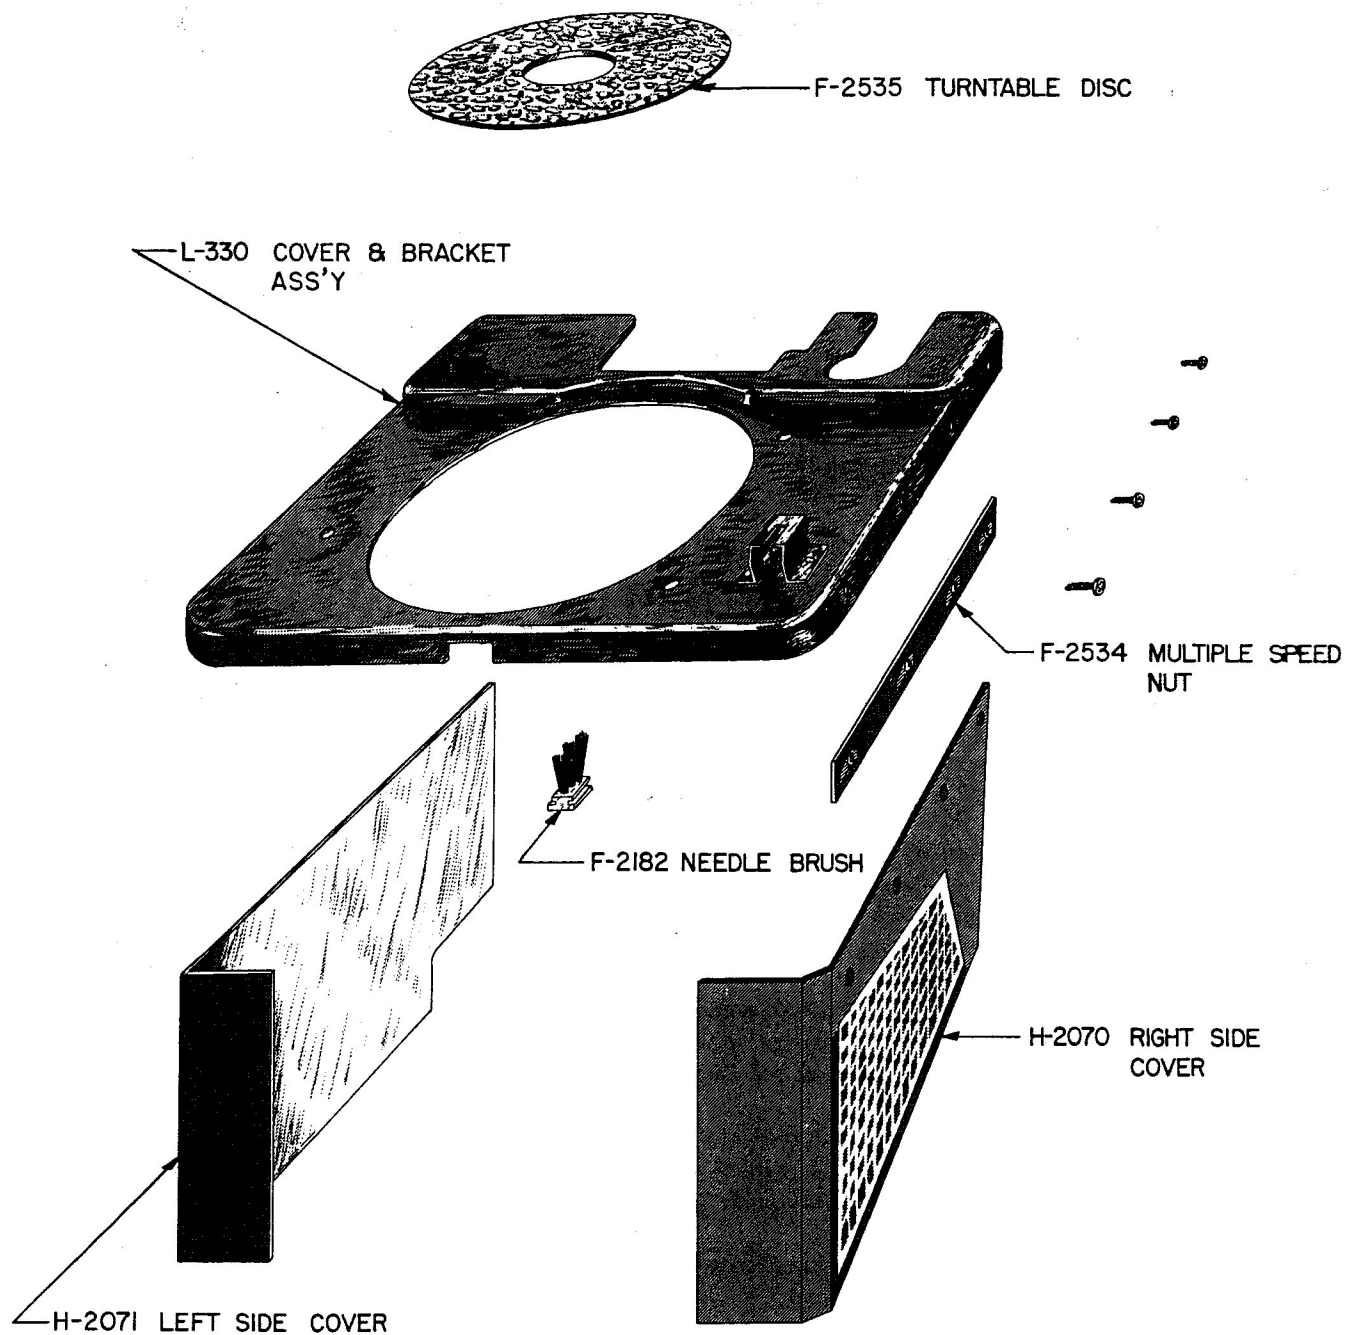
L-324 COVER ASSEMBLY PARTS GROUP
